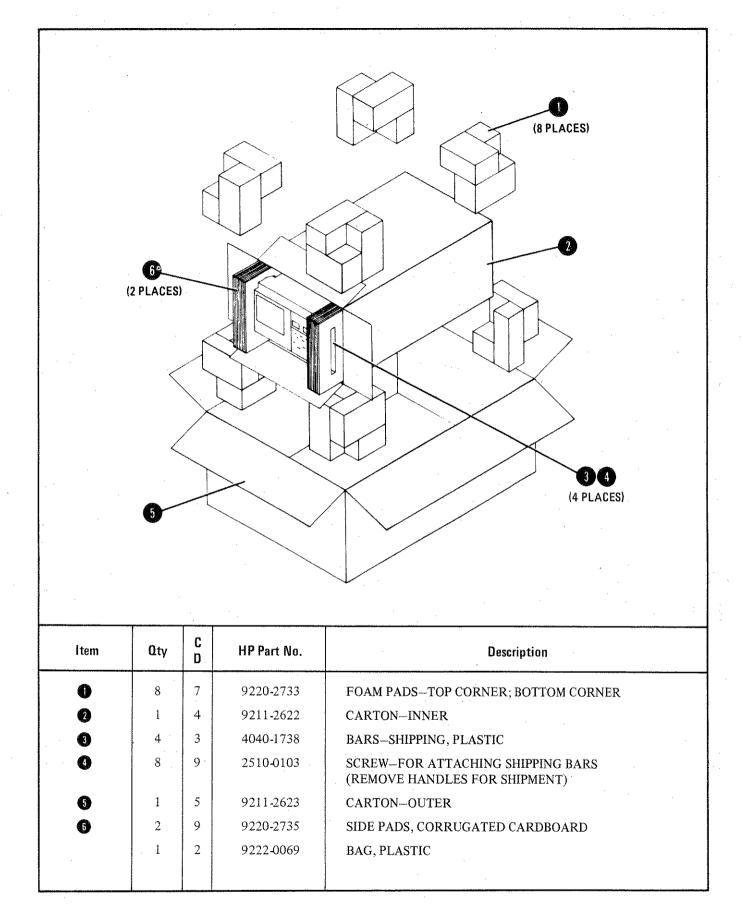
Packaging for Shipment Using Factory Packaging Materials
